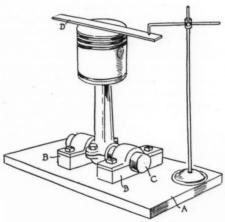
Top of piston can be scribed with height gage supported on surface plate. Each end of straight edge must be checked
